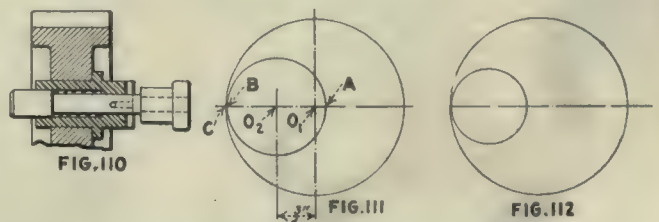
PUSH PIN LOCK FOR A LIGHT MACHINE. FIGS. 111 AND 112—SOLID ECCENTRIC SHAFTS
